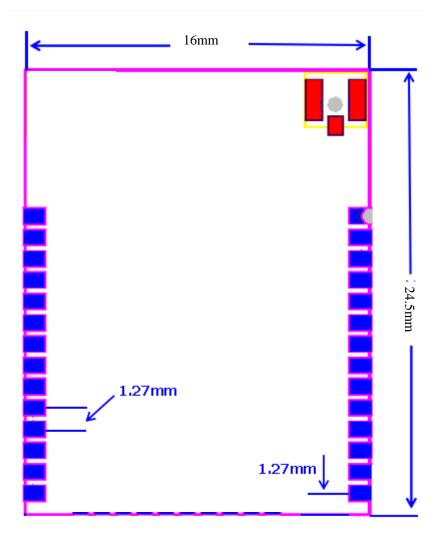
Mechanical Drawing and Dimensions The module size is 24.5\*16\*2.5mm
